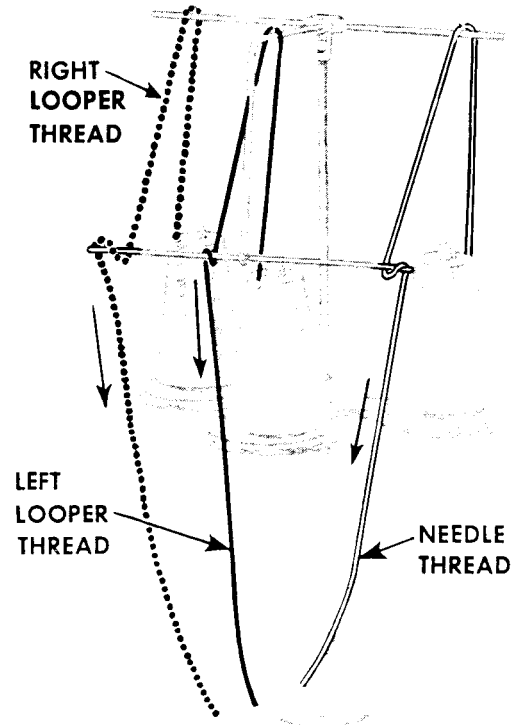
Unwinder 151031 Threaded for Three-Thread Stitch
